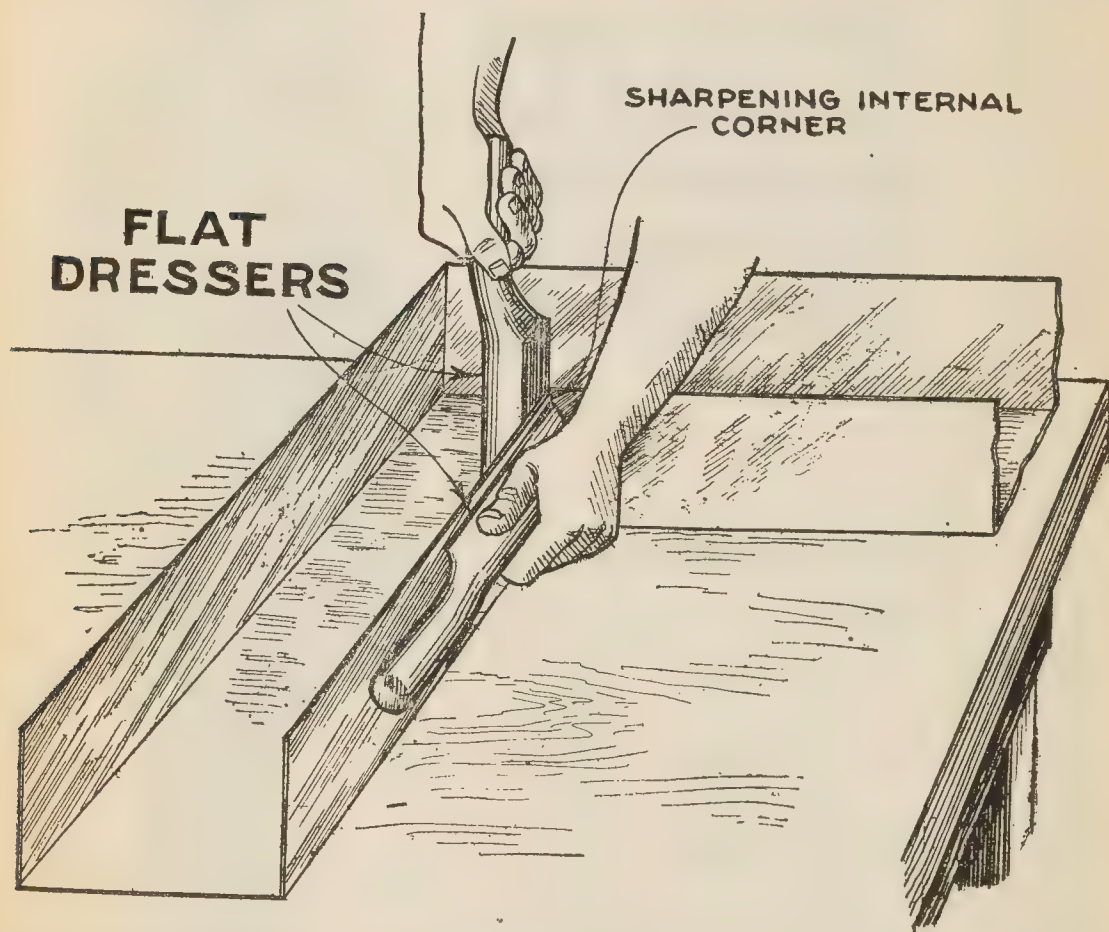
,553.—*Beating box gutter corner, 10.* Sharpening internal corner by beating with flat dresser using a second flat dresser for supporting the metal.
